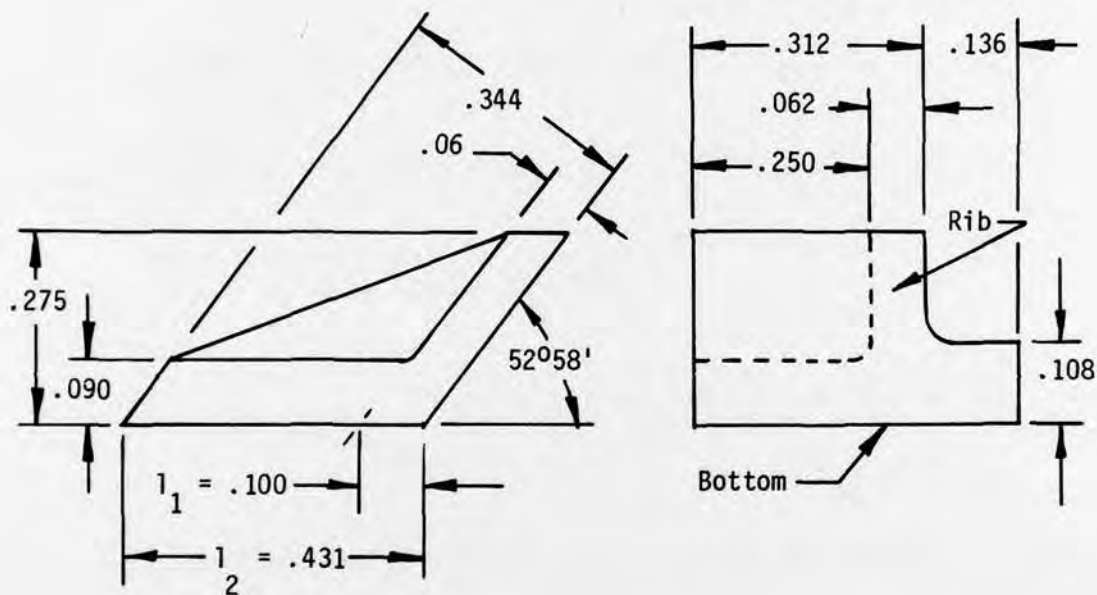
Redesigned Lug of Cage, Ramp-Roller Clutch.
